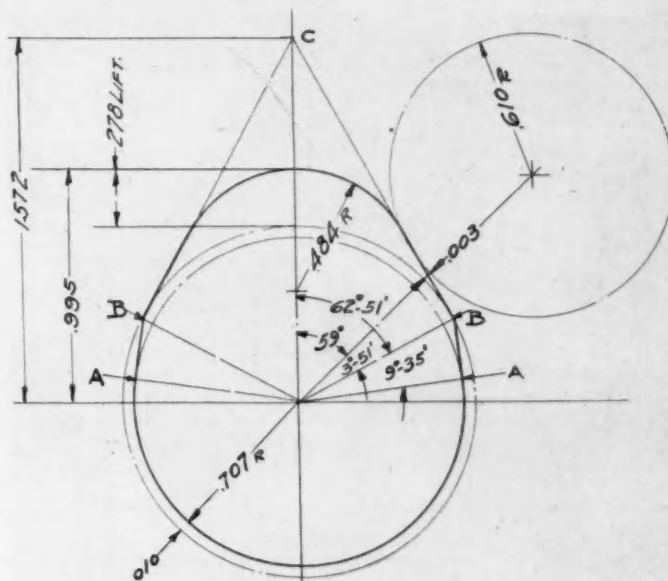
DETAILS OF THE INLET AND EXHAUST CAMS
